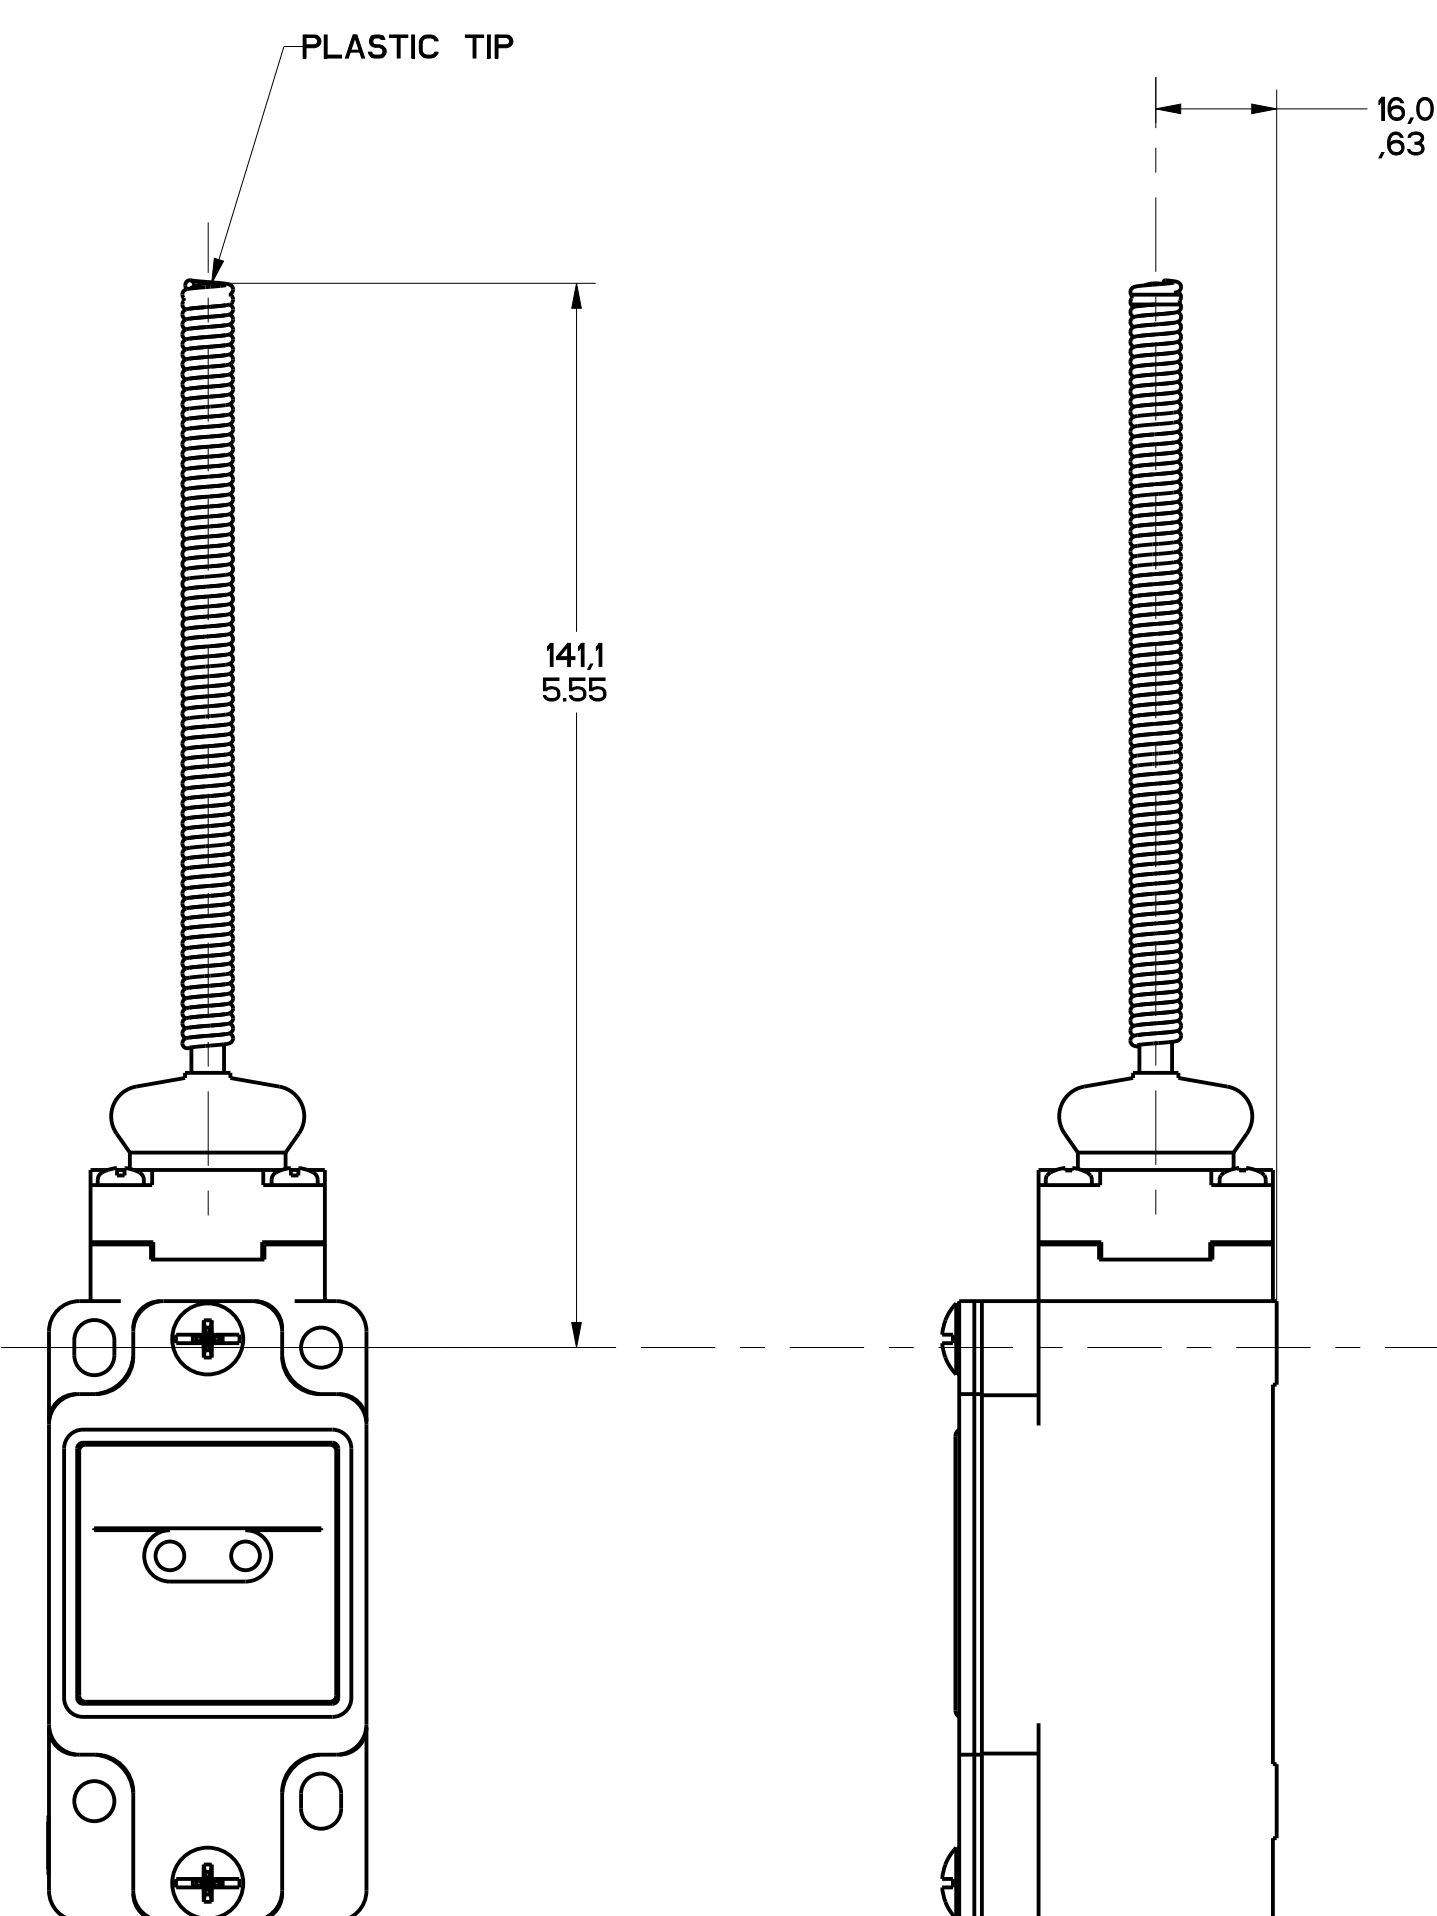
WOBBLE HEAD, AND CAT WISKER HEAD COIL ACTUATOR, OTHERWISE REFER TO FIGURE 1
